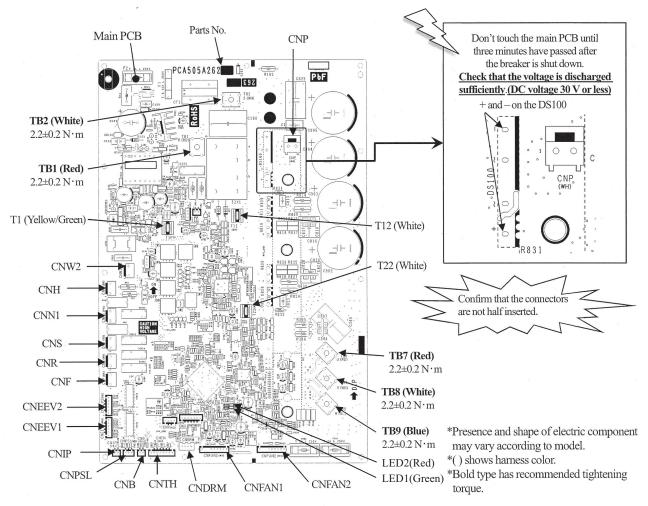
Parts arrangement view of main PCB and voltage measurement points
